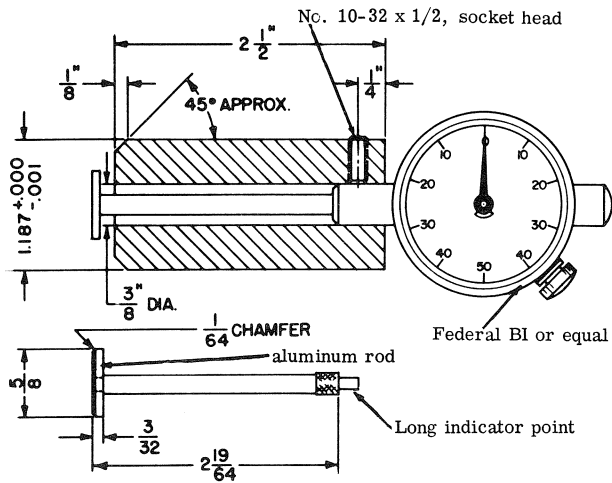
FILM PRESSURE ADJUSTING GAGE G8-38000
